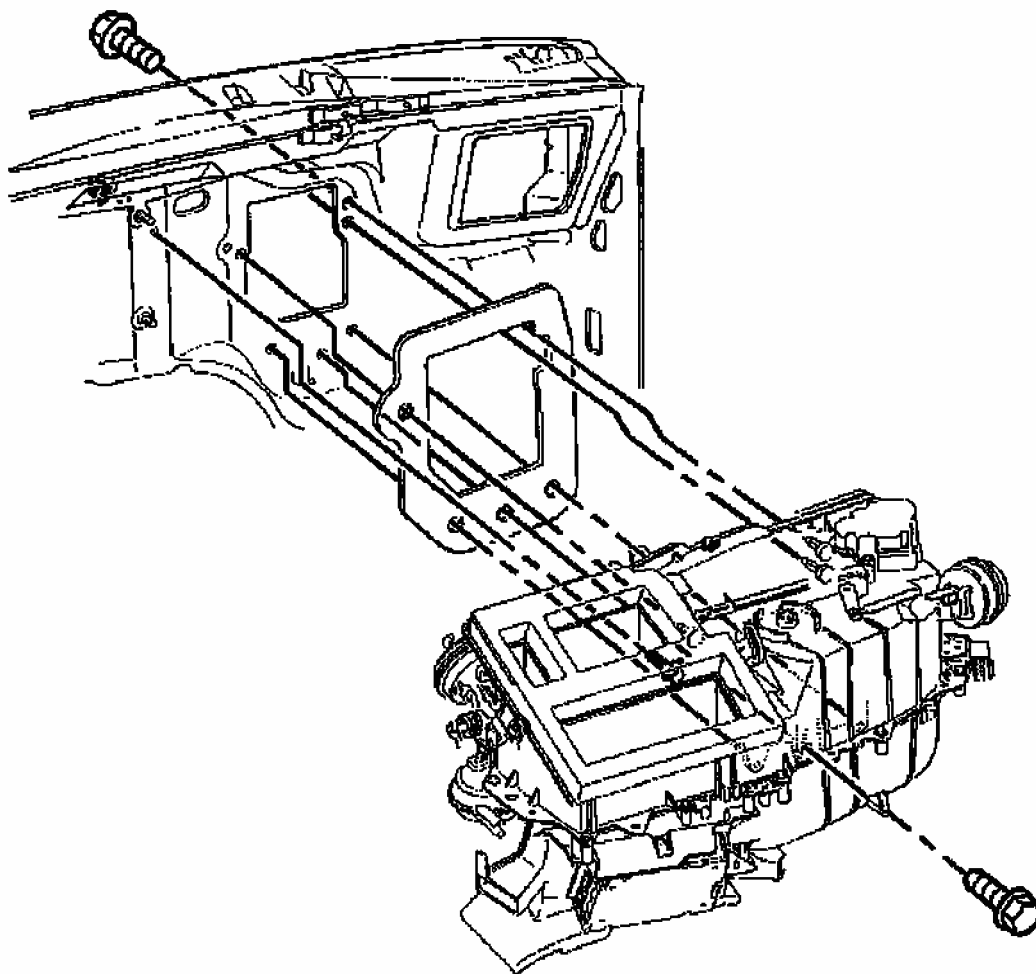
Identifying Wheelhouse Panel & Screws
